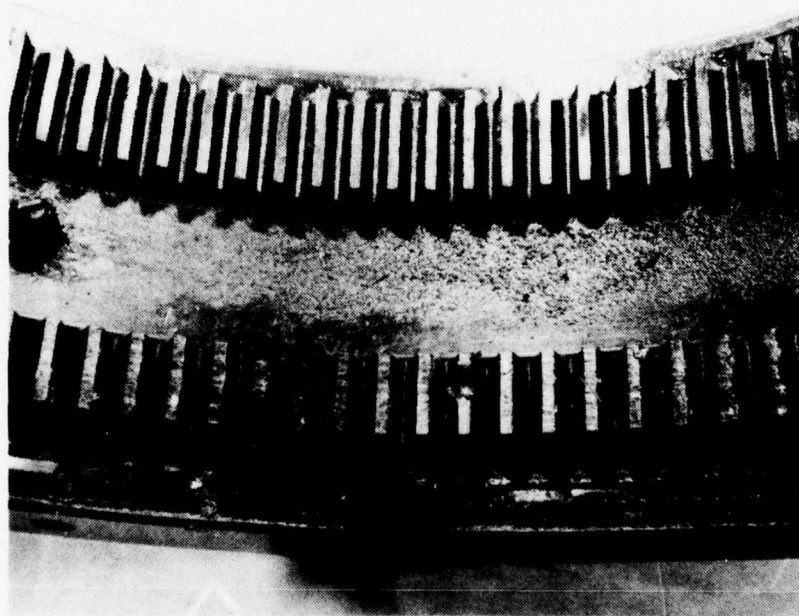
Upper ring gear teeth (top) and lower ring gear teeth (bottom) after 21-minute loss-of-lube retest of transmission number 1.
